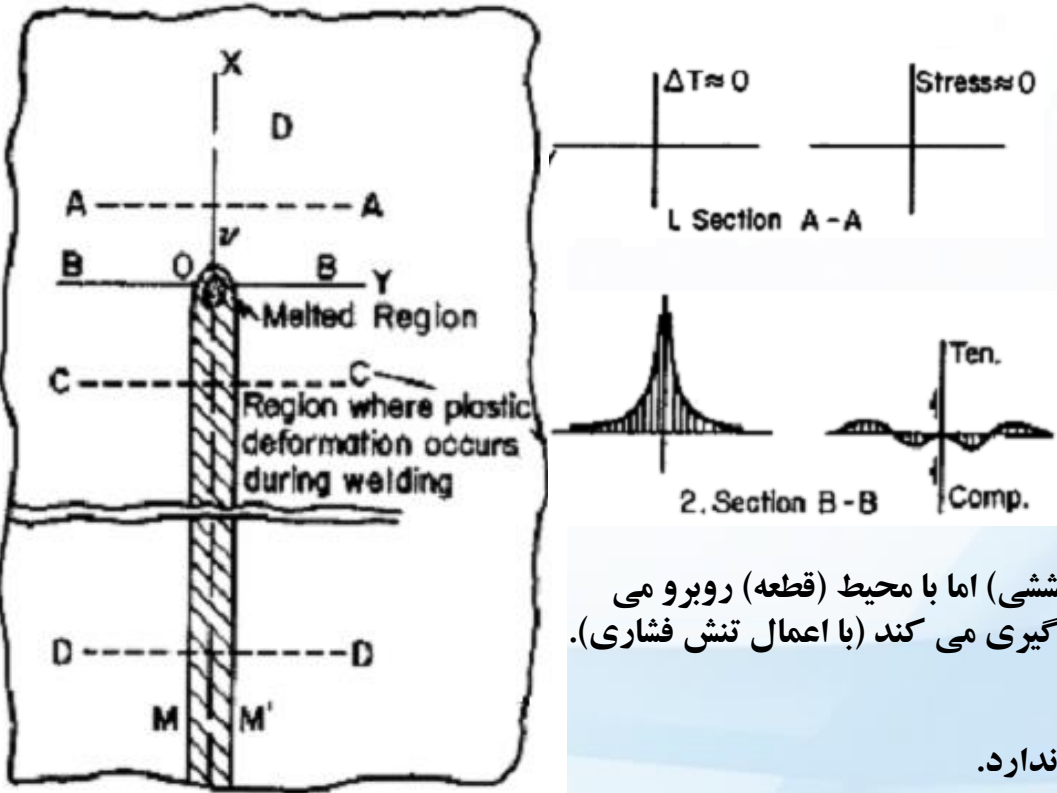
Changes in temperature and stresses during welding. Reprinted from Welding Handbook (2). Courtesy of American Welding Society.
